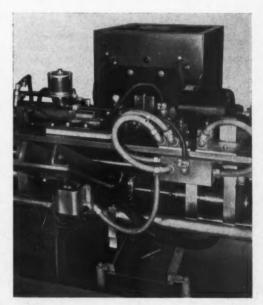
Close-up view of an automatic machine for induction case-hardening gudgeon pins. The component is held between centres and moved axially through an induction-heating coil and water-spray quenching ring
